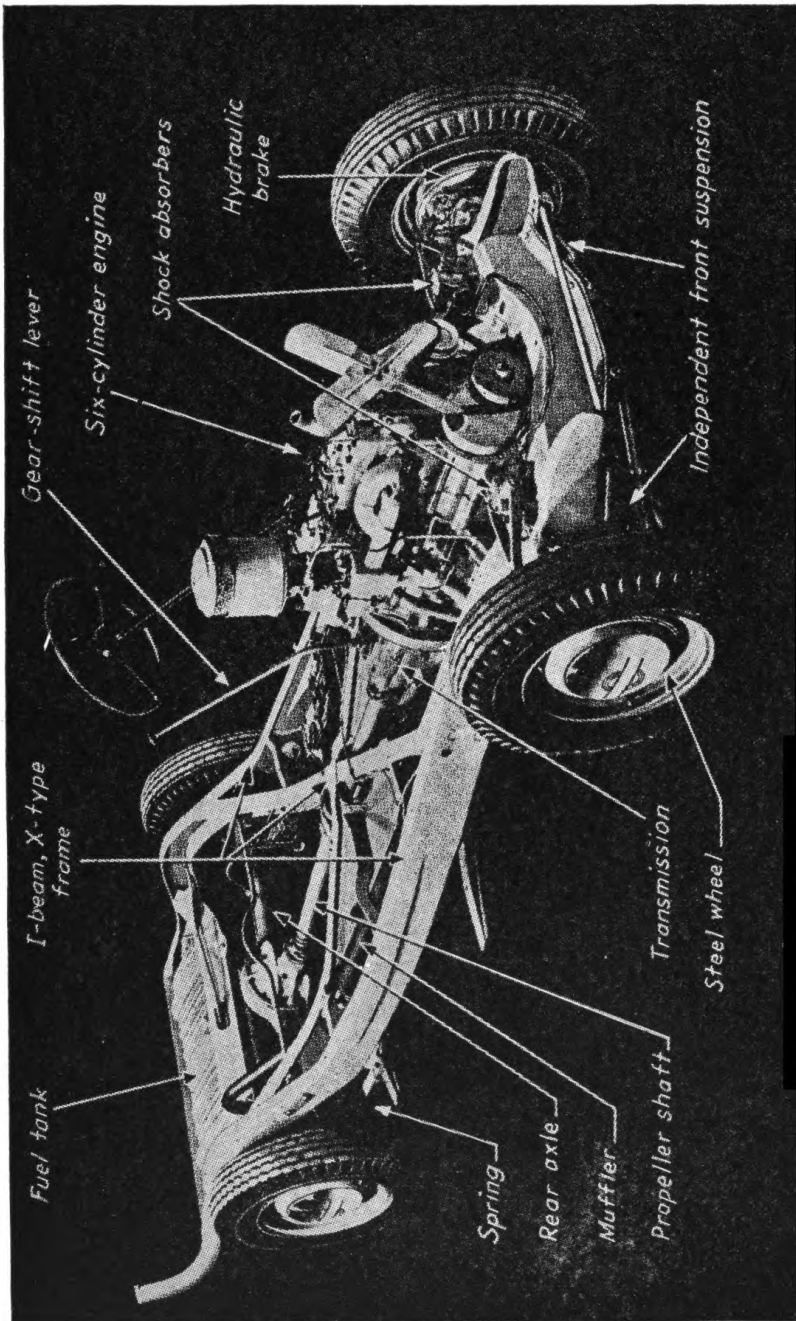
Modern gasoline engine-driven passenger car chassis showing its various parts.
